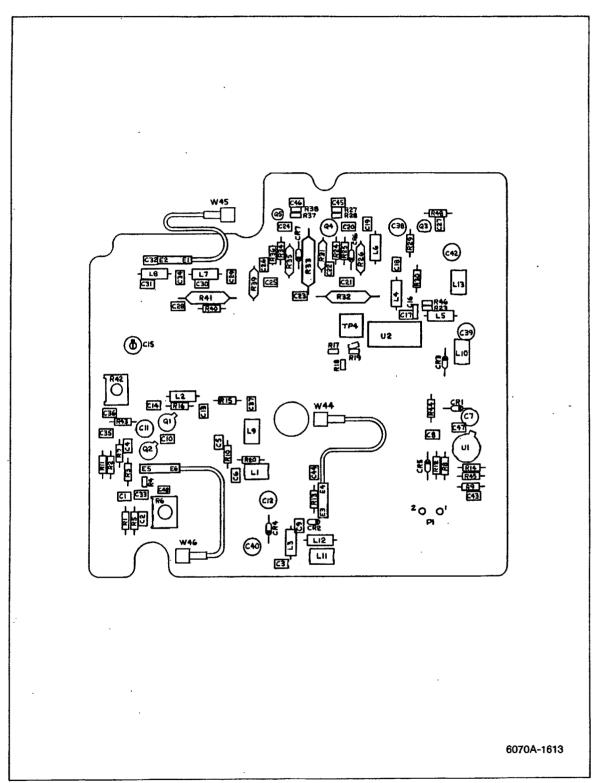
A4A9 Hetrodyne Converter PCB Assembly
